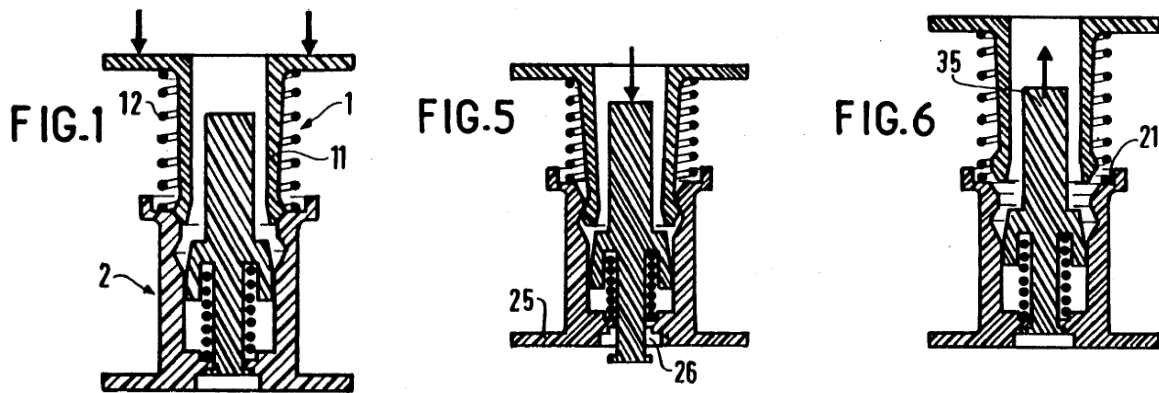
is a section view showing the device while it is being locked. *Id.* at 2:18–19. Figures 5 and 6 are section views showing the device while it is being unlocked. *Id.* at 2:22–23.
